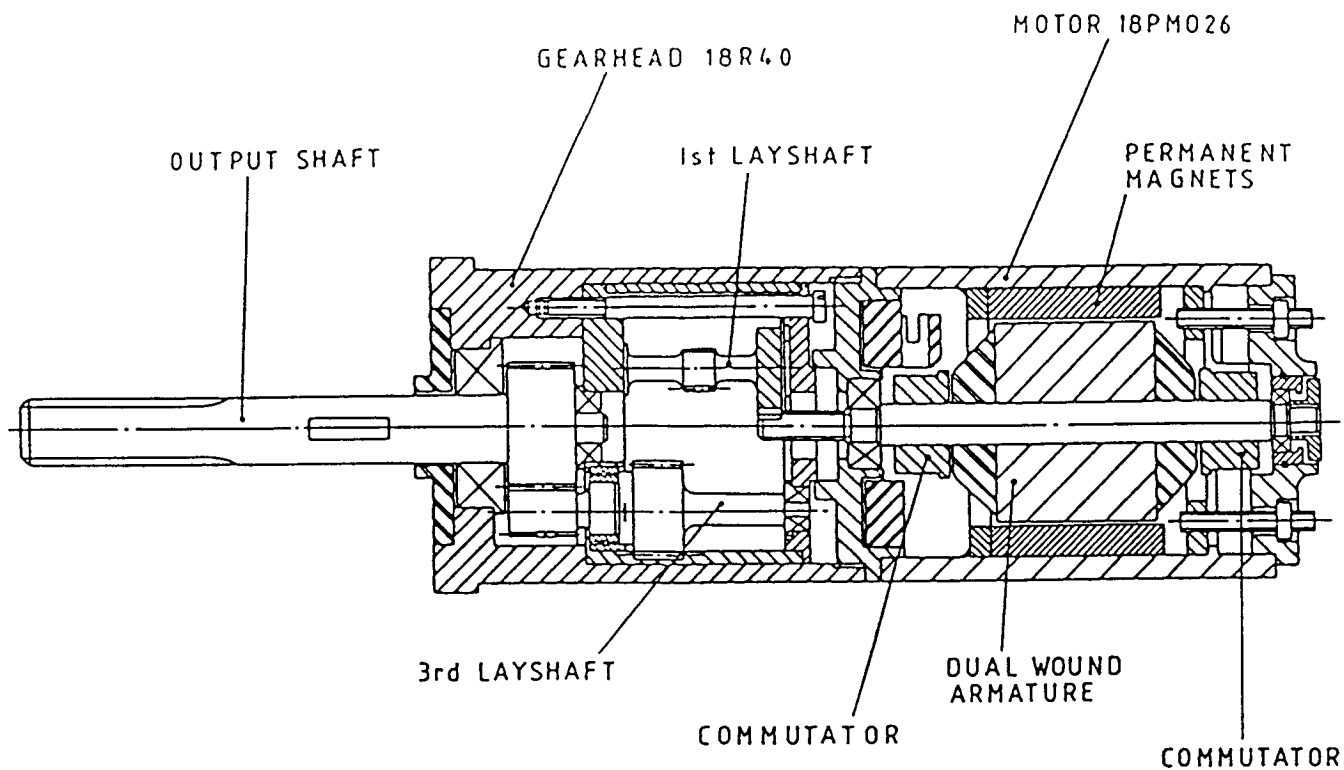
Section view of dual wound motor gearhead. Note second layshaft omitted for clarity.
